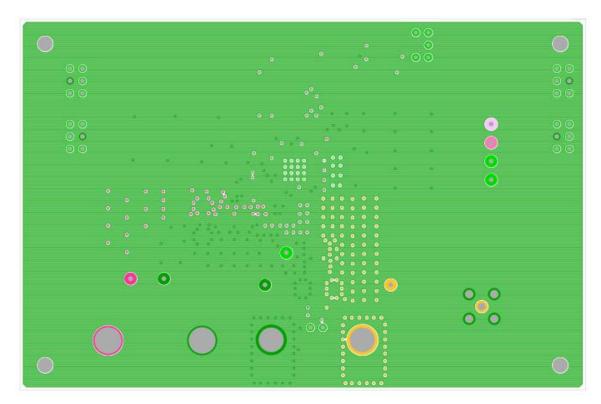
PCB - Inner Layer - Layer 2 (Top View)
